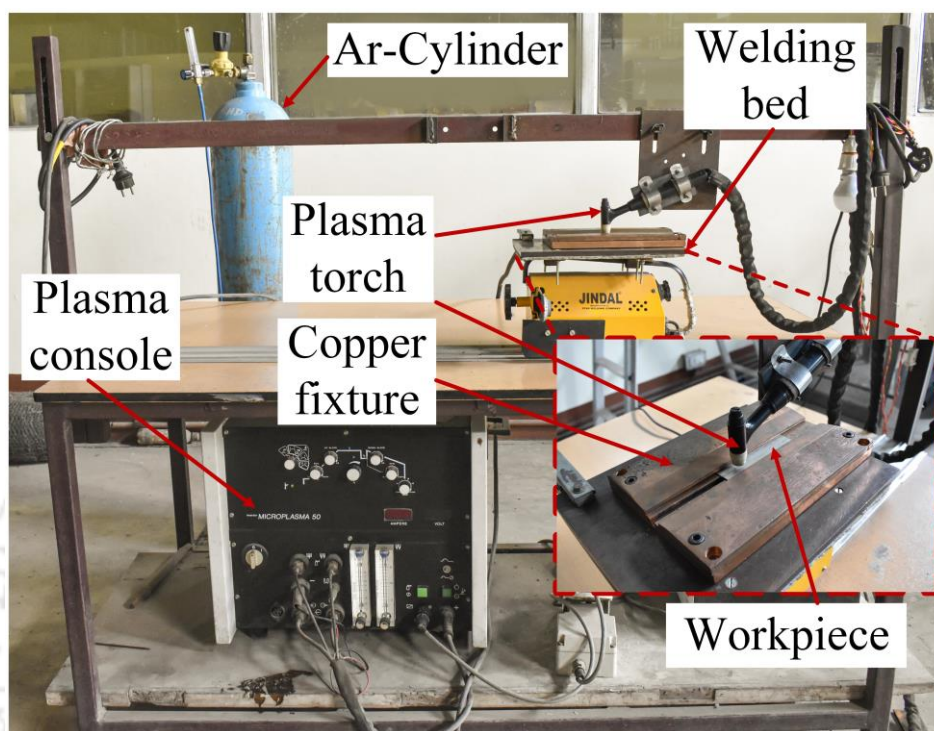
Micro plasma arc welding setup used in this research work
